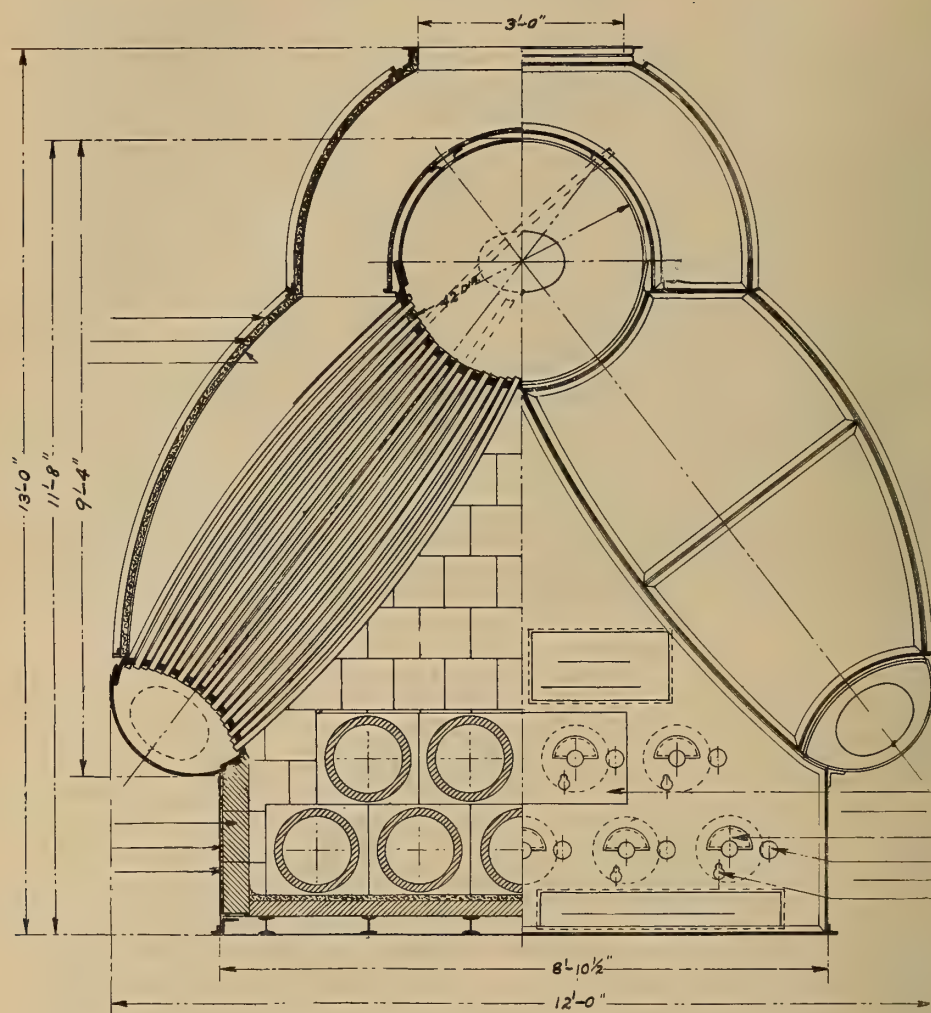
MOSHER PATENT WATER-TUBE BOILERS FOR HIGH-SPEED YACHTS, ARRANGED FOR OIL-FIRING
